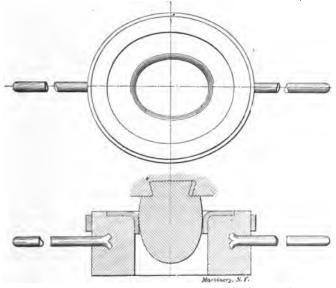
Die Used for Forging and Bending Man-hole Seatings
